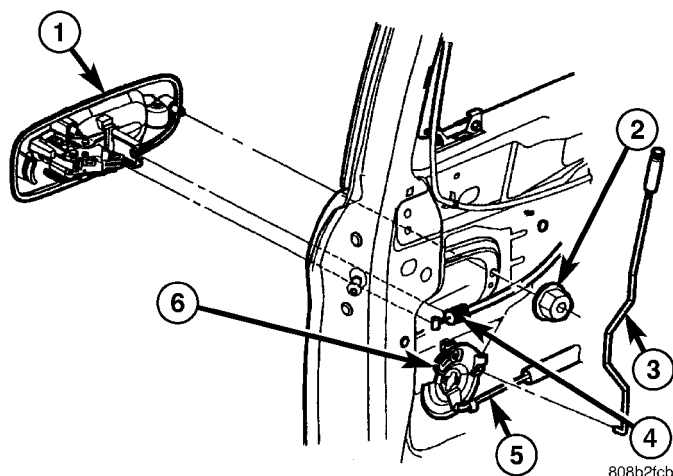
SLIDING DOOR OUTSIDE LATCH RELEASE HANDLE
